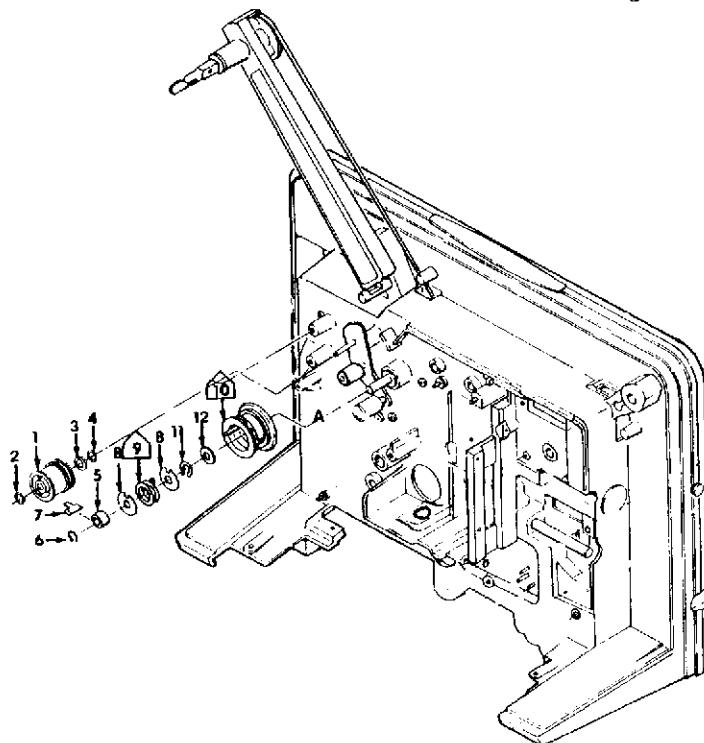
REMOVAL AND REASSEMBLY OF TAKE-UP SPROCKET
